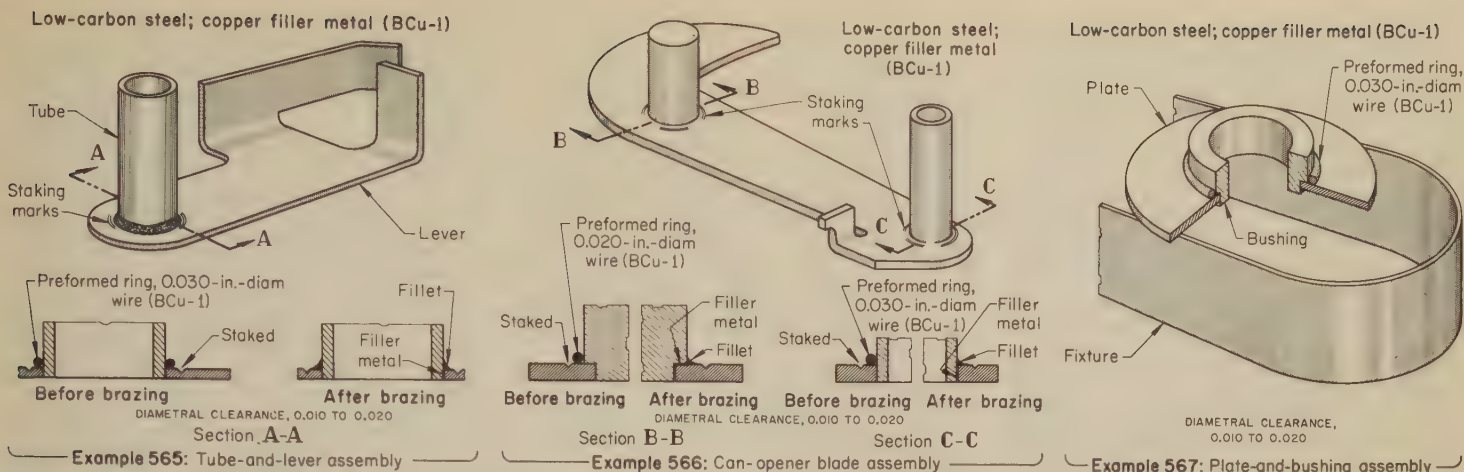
Three steel assemblies for which furnace brazing was substituted for manual torch brazing (Examples 565, 566 and 567)
